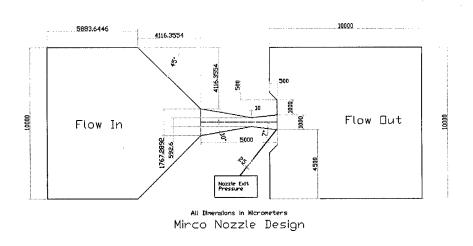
Top view drawing of Mach 2 C-D Nozzle. All dimensions are in microns.
